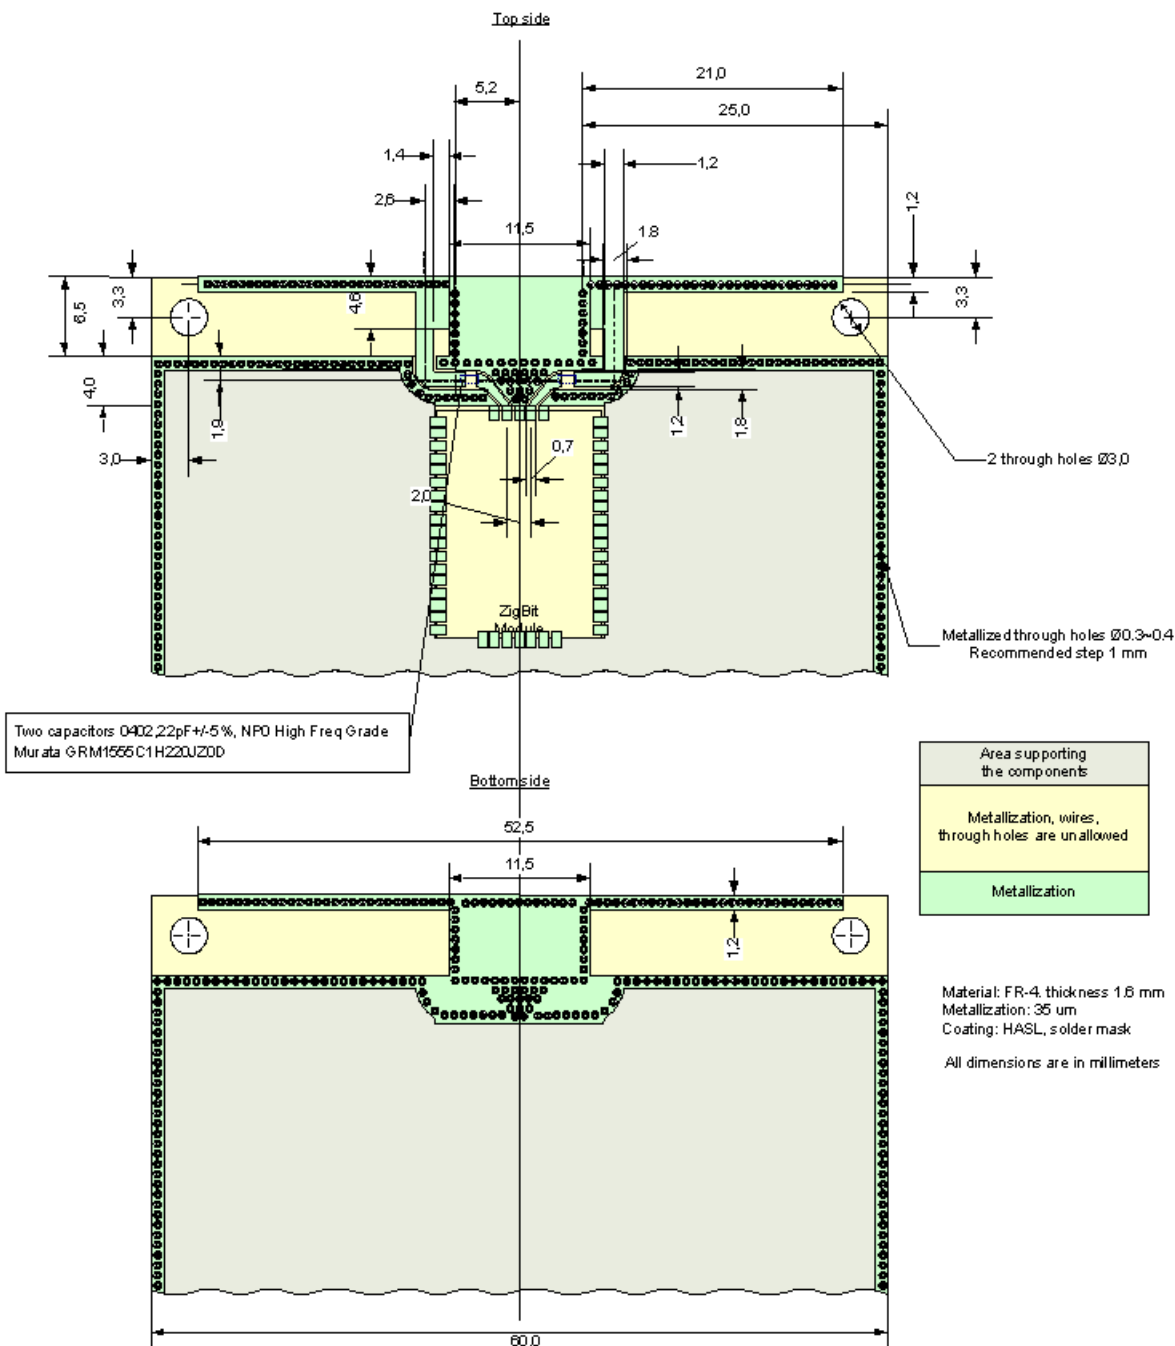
ATZB-24-A2 PCB Recommended Layout, Top View
